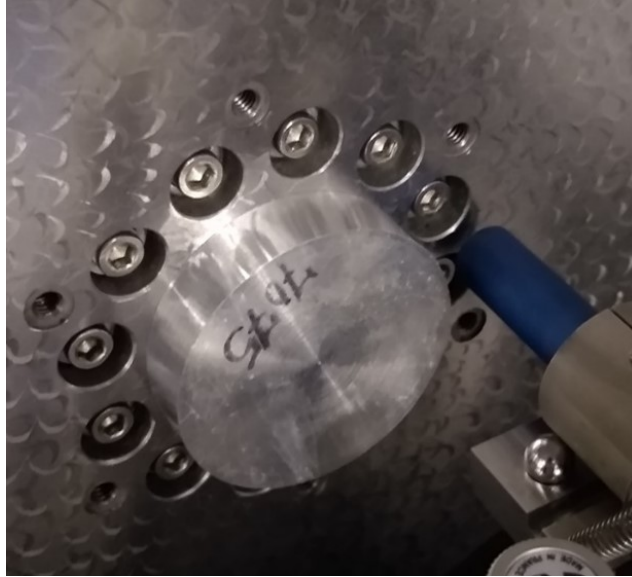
Testing the effect of vacuum on the air bearing of the C carriage.
